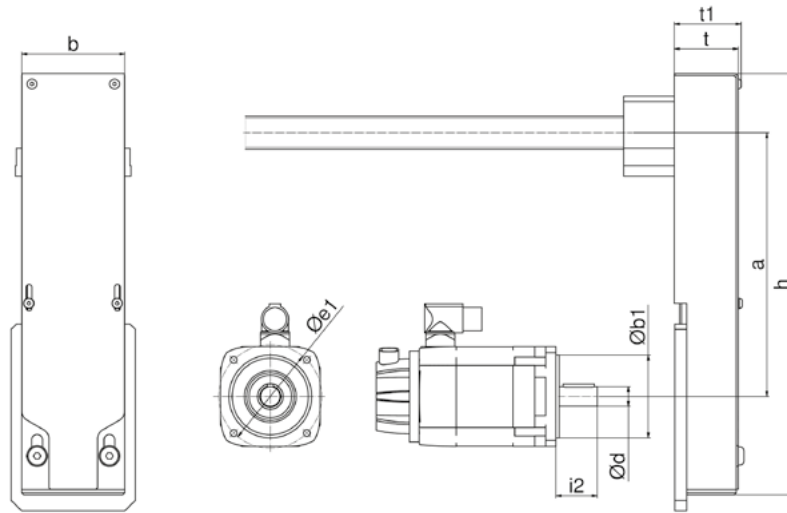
Dimension of standard deflection belt drives for BSTK bearing units
